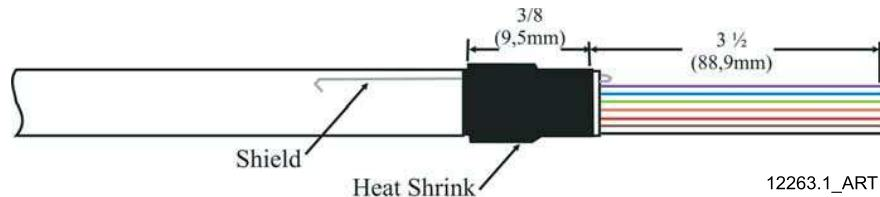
Seven-Conductor Control Head Cable Shield Wire and Heat-Shrink
